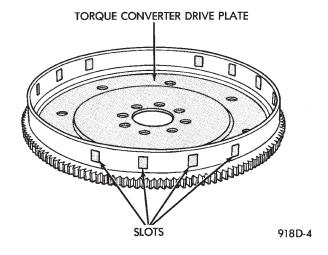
Timing Slots in Transmission Driveplate eration of the system. When servicing the crankshaft sensor, refer to the 3.3L Ignition System—Service Procedures section in this Group.
